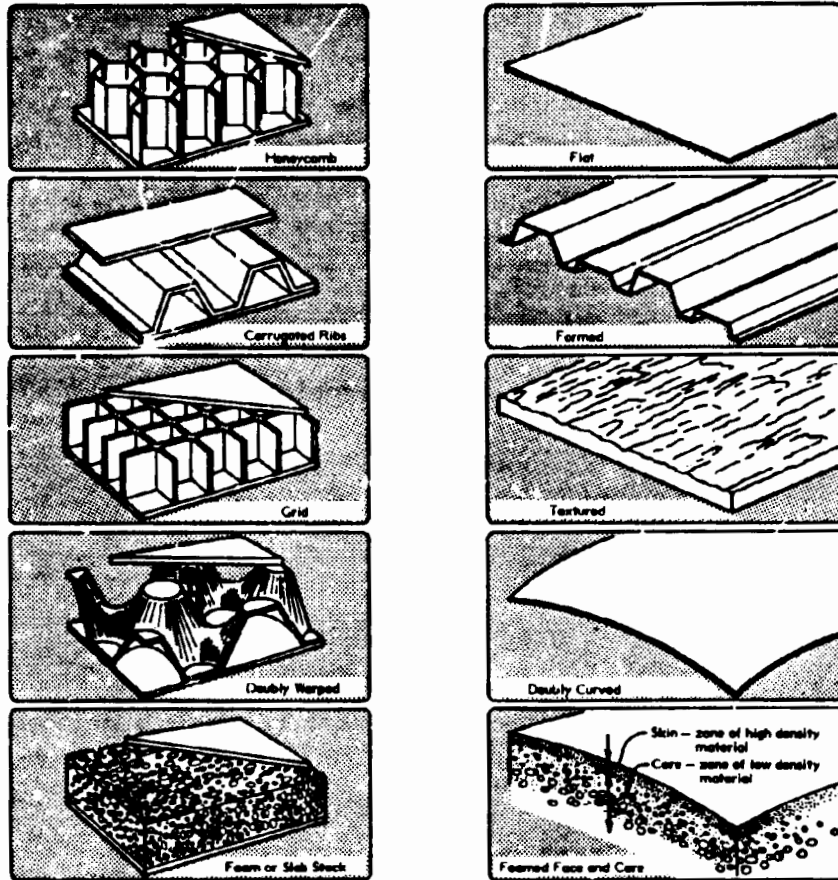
GENERAL ARRANGEMENT OF SANDWICH CONSTRUCTION
